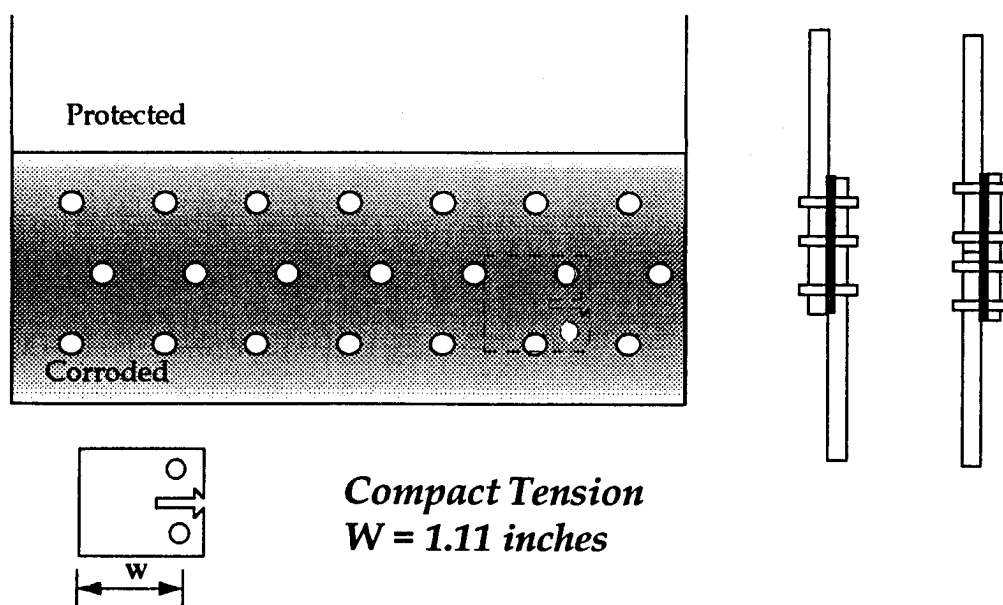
Schematic of typical joints used in this study. Corrosion typically present in Lap or Butt joints with several rows of rivet holes. Also show is the primary crack growth specimen utilized.
